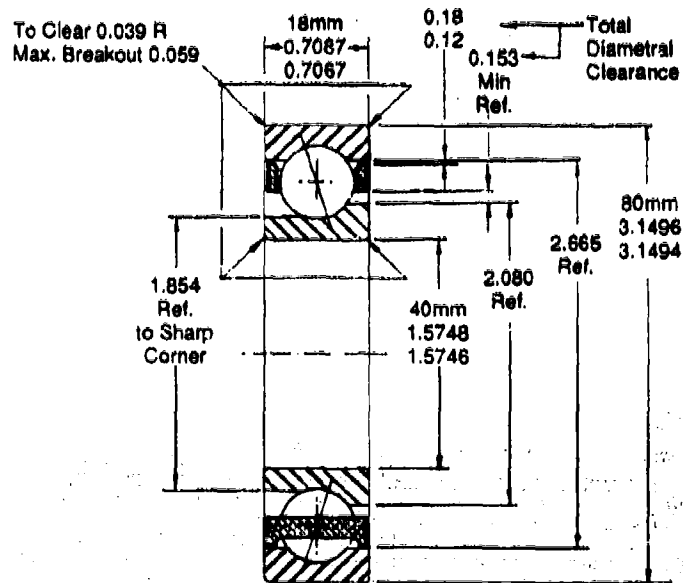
Engineering Drawing of 40-mm-Bore Ball Bearing.
